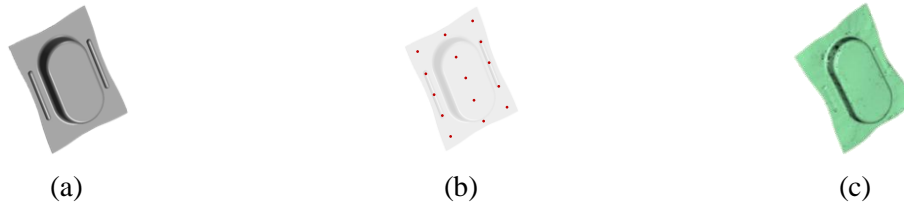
Representation of (a) a CAD model of a manufactured part; (b) a CMM or OCMM measurement systems that only measures a set of specified points; and (c) an actual laser scan that captures all product characteristics
